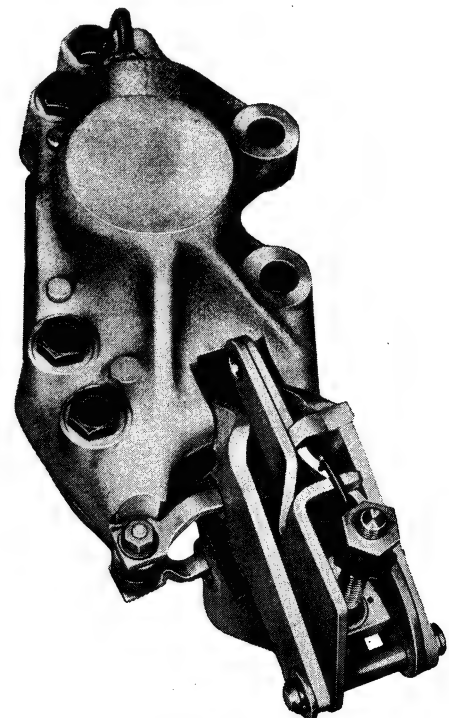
Left rear caliper assembly with manual brake mechanism - 1600 S Cabriolet.
